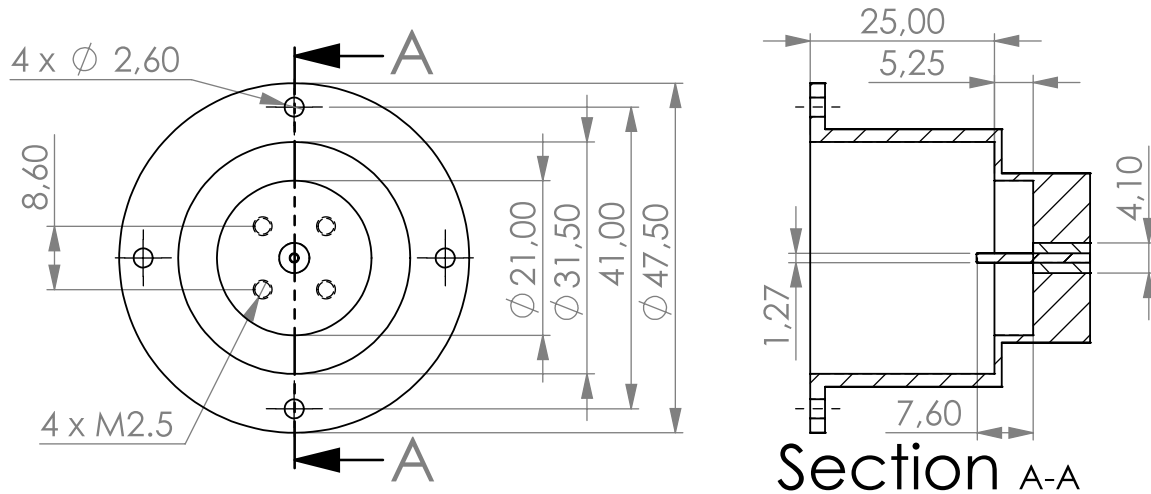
Drawing of the TM mode coaxial adapter. All dimensions are given in mm.
